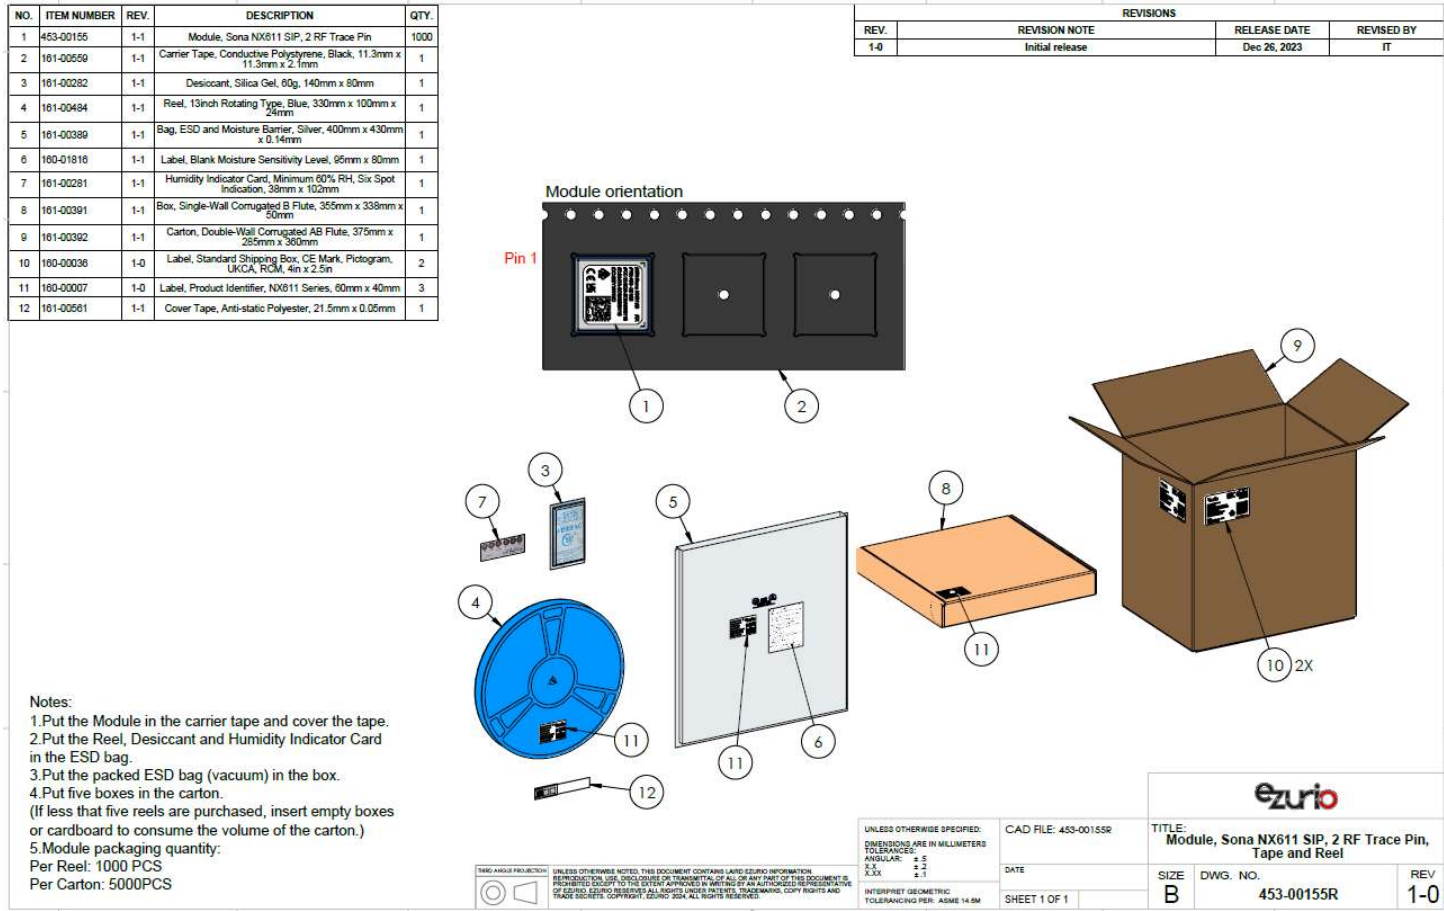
SONA™NX611 SIP module packaging process, 453-00155R
